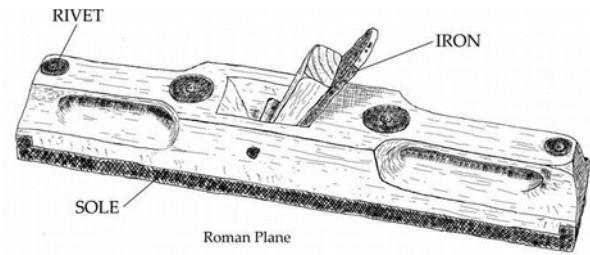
Rendering of Roman Plane (Source: Stanley Works Ltd., A Brief History of the Woodworking Plane)
